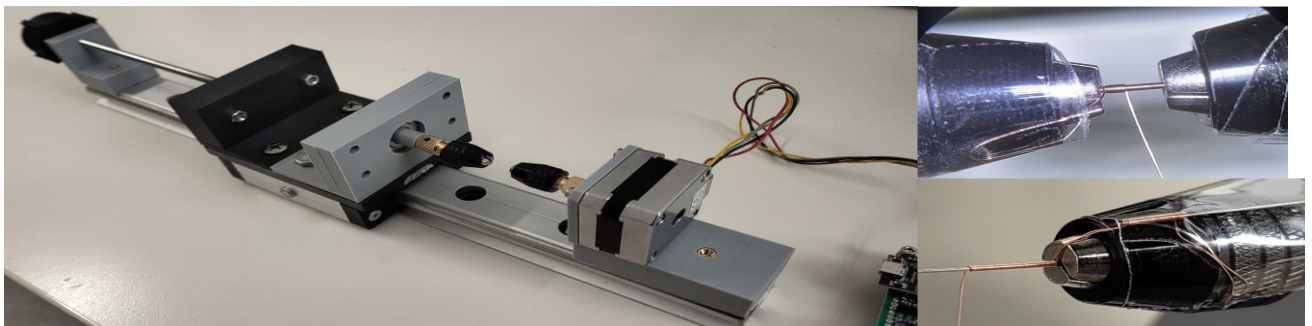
Coil winding machine to produce cylindrical Sensors and transmission lines. circular and oval sensor coils were manufactured. 3D-printed Molds were created in which the sensors were embedded in silicone.
